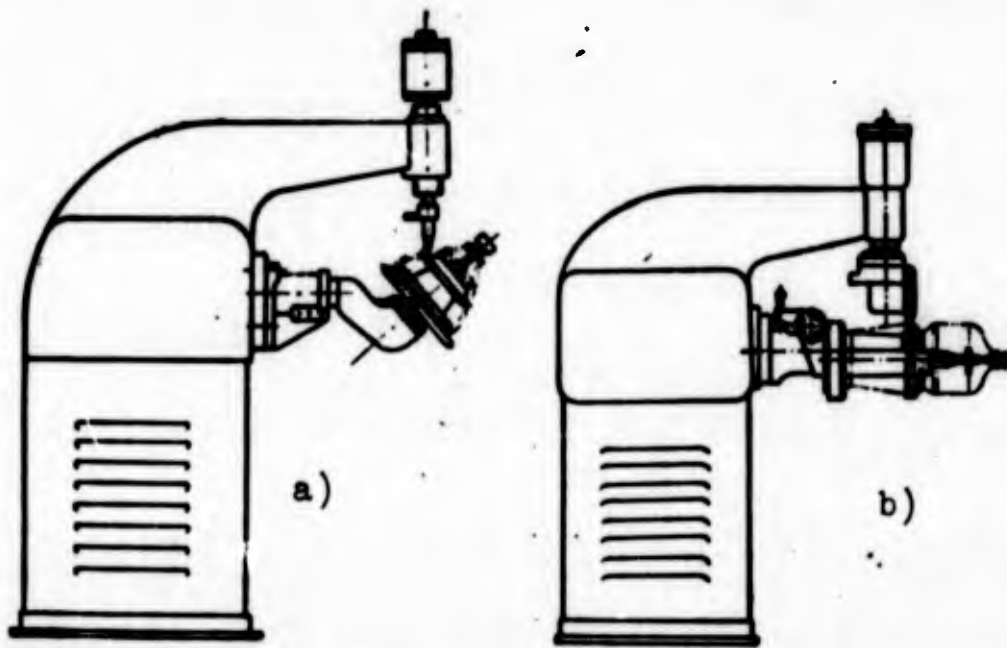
Fixtures for welding assemblies of a flame tube. a) on machine for spot welding; b) on machine for seam welding.
